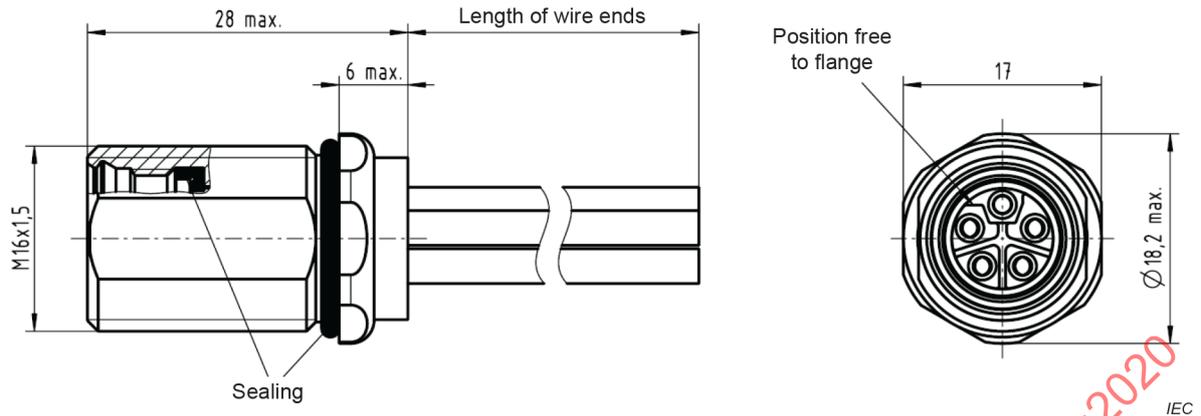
Fixed connector, female contacts, mounting with thread M12 × 1 and inner push-pull locking, with wire ends, single hole rear mounting thread M16 × 1,5
